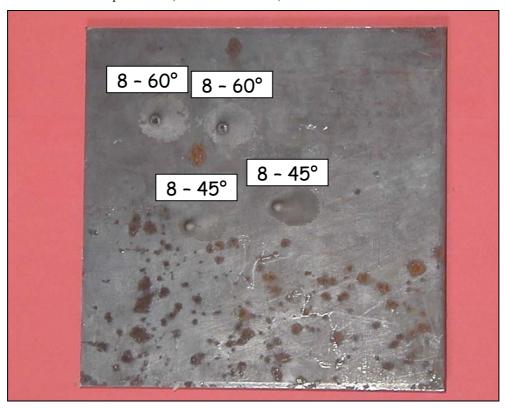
Steel plate 6 mm, material 11373-75, side of shoot in
